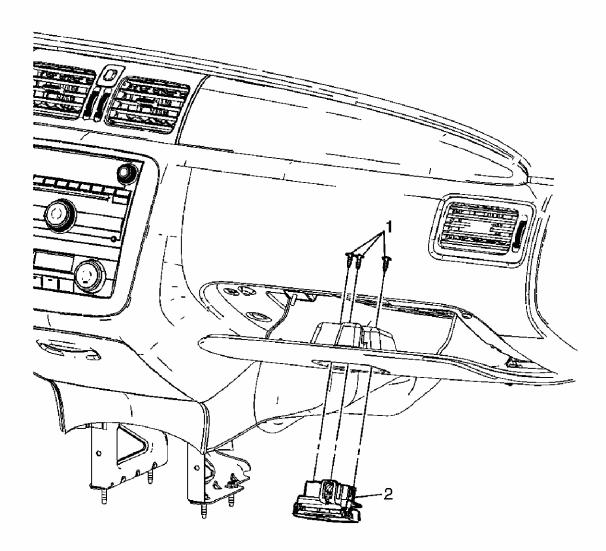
Locating Instrument Panel Compartment Door Latch Courtesy of GENERAL MOTORS CORP.
